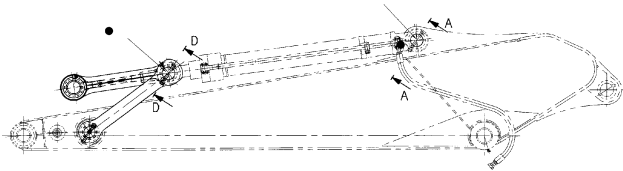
Detail of bucket cylinder rod pin (H)
